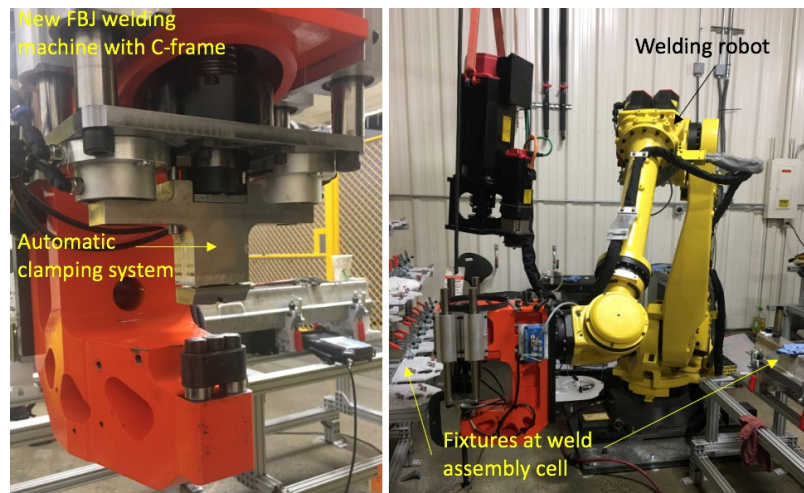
Integrating a new FBJ welding head with a robotic system and fixtures at a welding assembly cell for the demonstration phase. Source: ORNL
